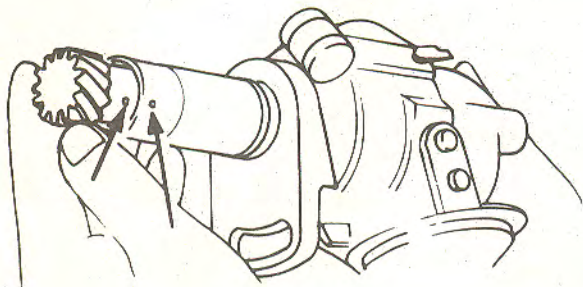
Before installation of the distributor, align the marks on the distributor body and the driven gear as shown.
